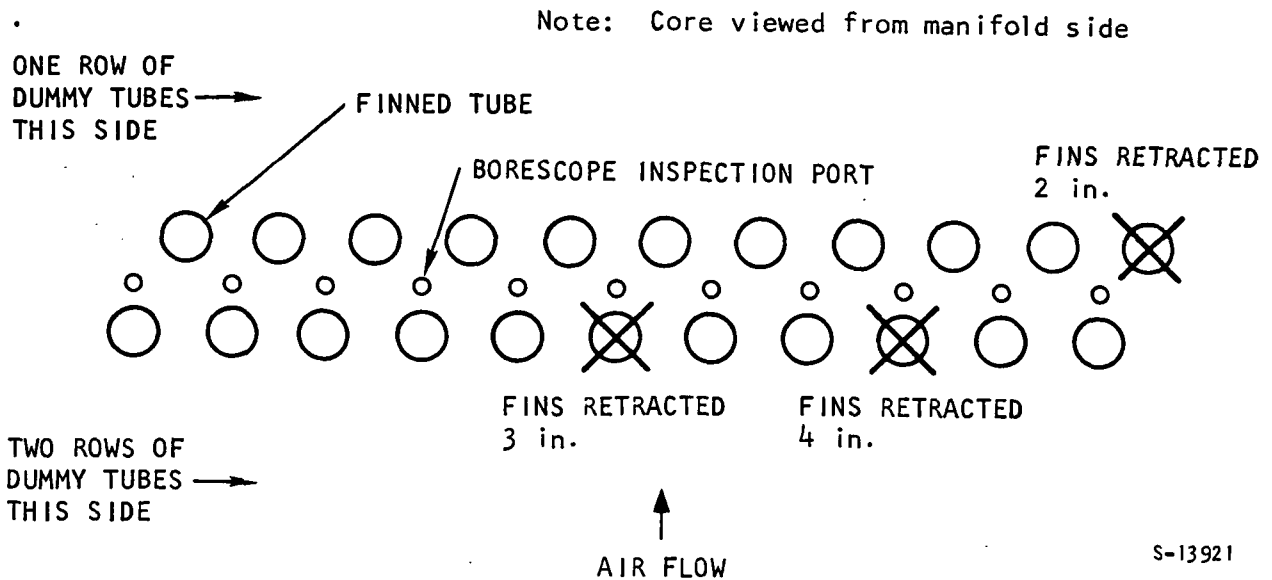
Borescope Inspection of Finned Tube Test Core
